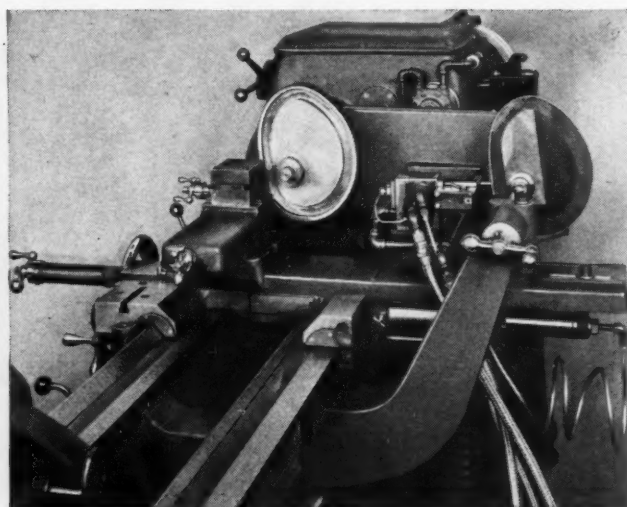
Contour Cam Turning on Springfield Machine, Using a Revolving, Flat, Thin, Sheet-metal Templet
